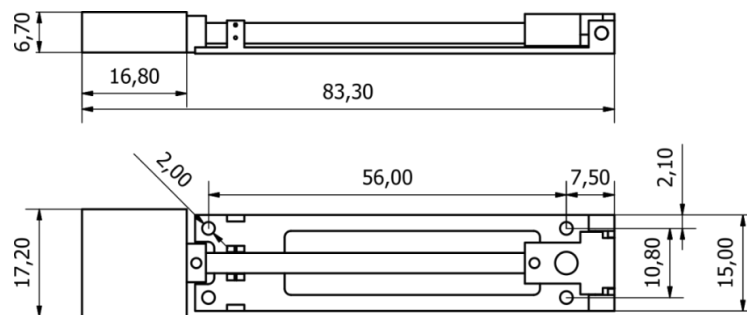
Deployable magnetometer dimensions and mounting locations.
